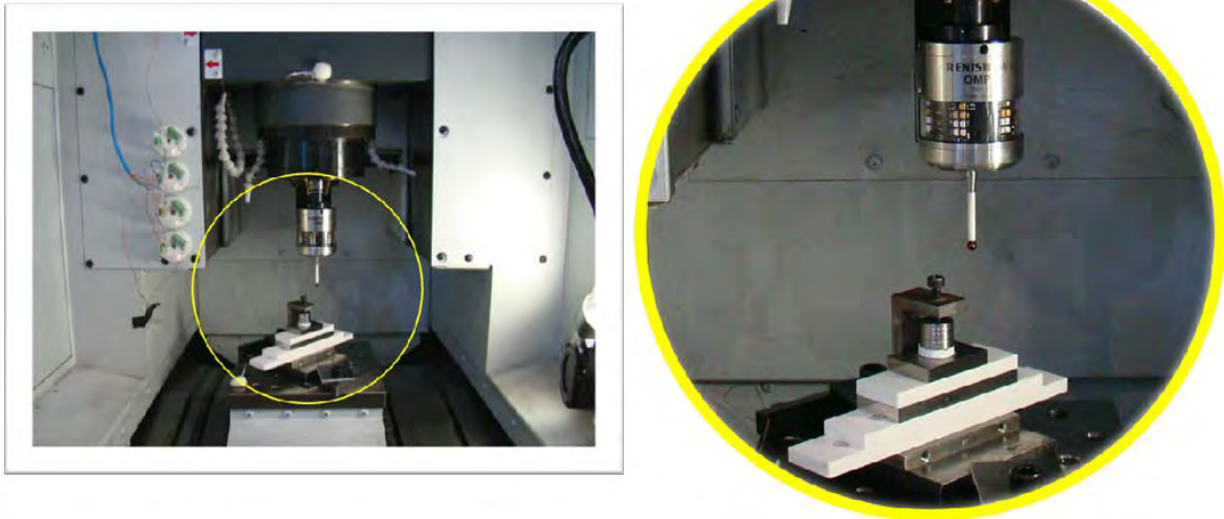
Set up used to calibrate the machine NVD1500 DCG for dimensional inspection (Coelho et al., 2009).
